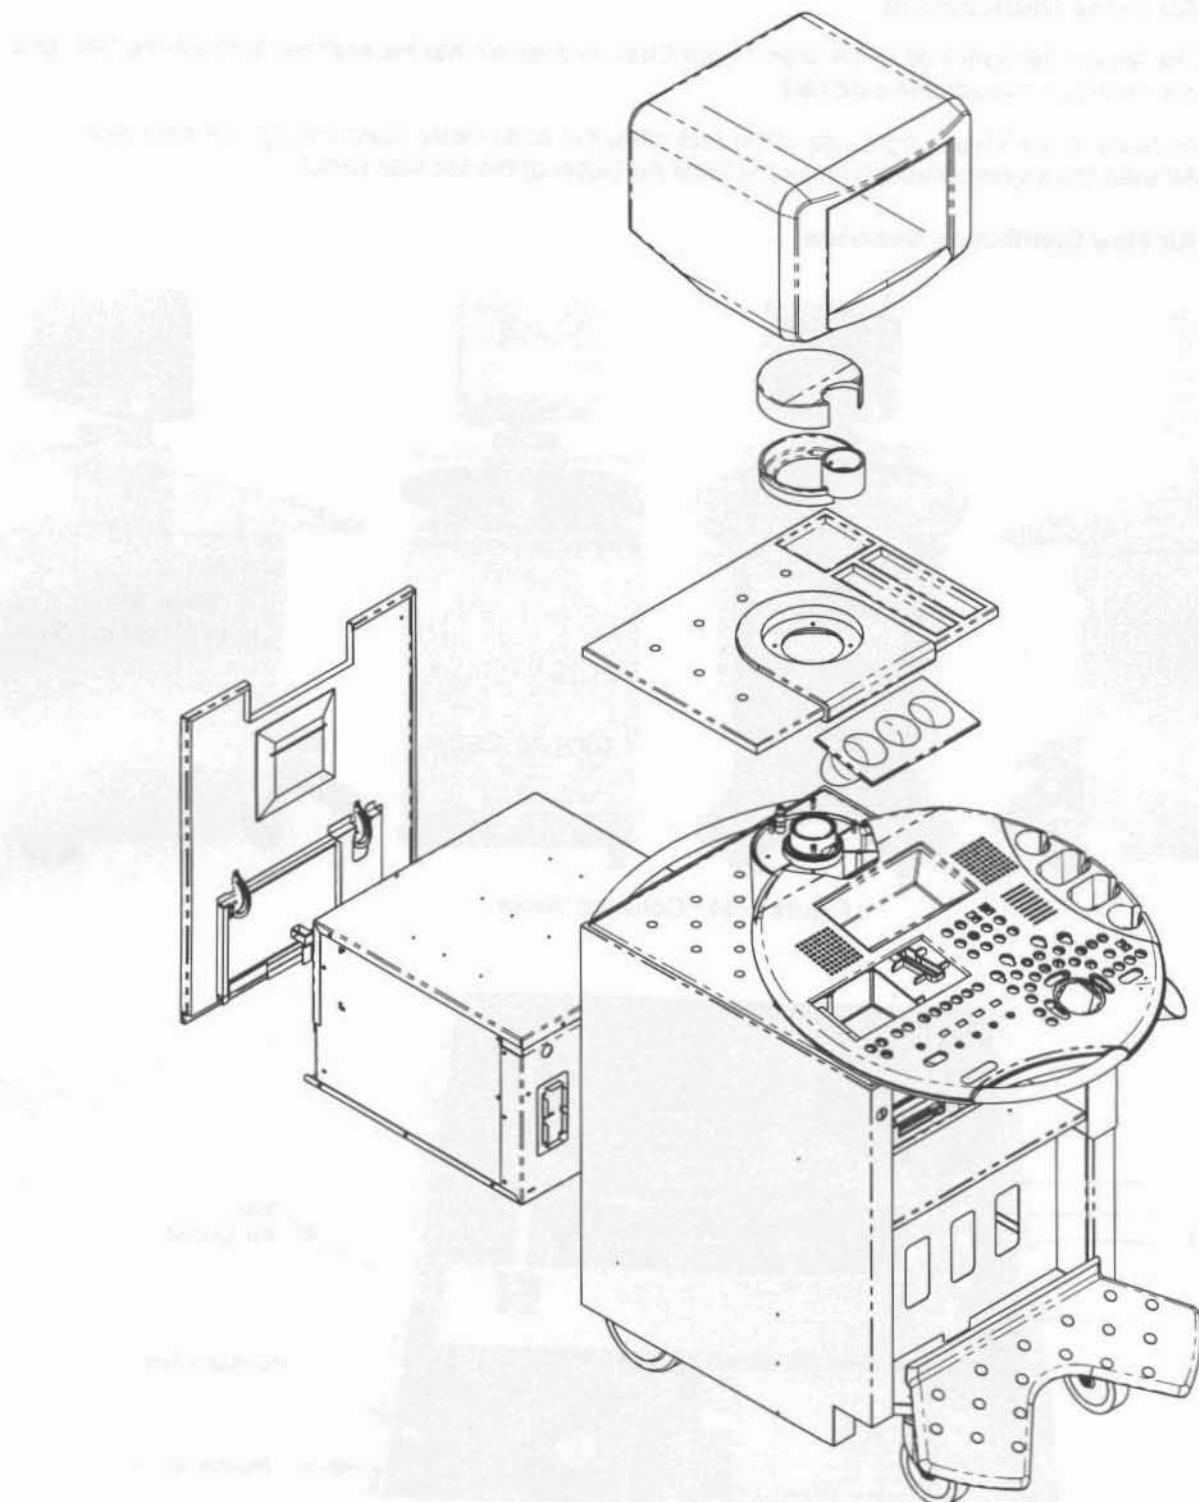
Assembly Drawing GW & GEU & Monitor
